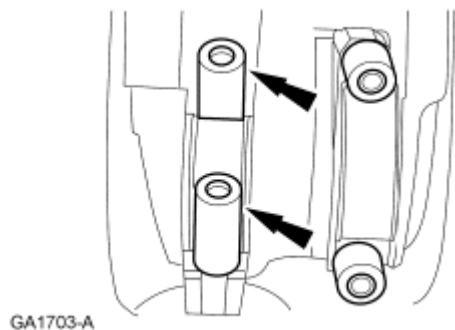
Locating Rubber Hose Pieces On Connecting Rod Bolts
